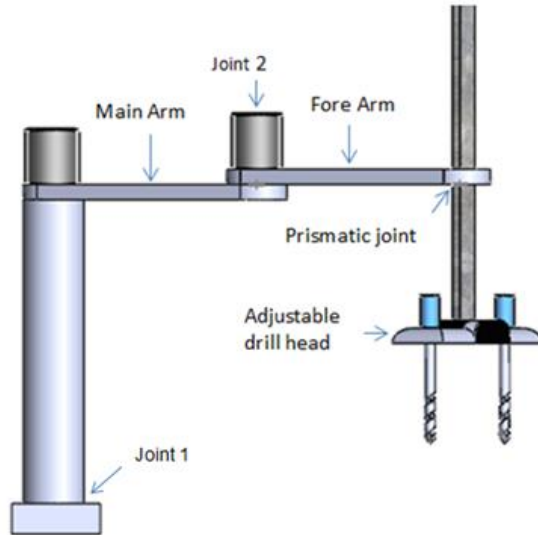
Solid Works model of SCARA with proposed adjustable drill tool head
